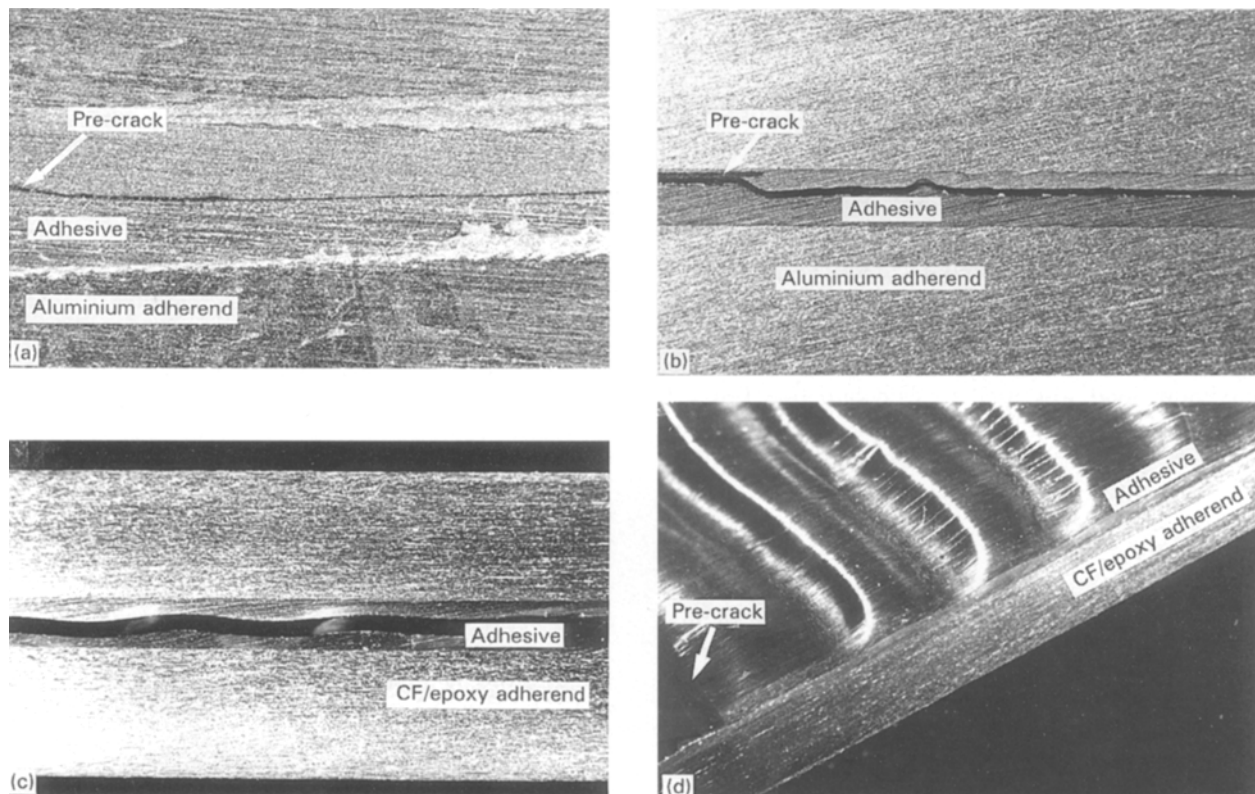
Crack paths in (a) CT aluminium-epoxy joint, (b) DCB aluminium-epoxy joints, and (c) a DCB composite adhesive joint; (d) fracture surface of a DCB composite. Crack growth is from left to right.
